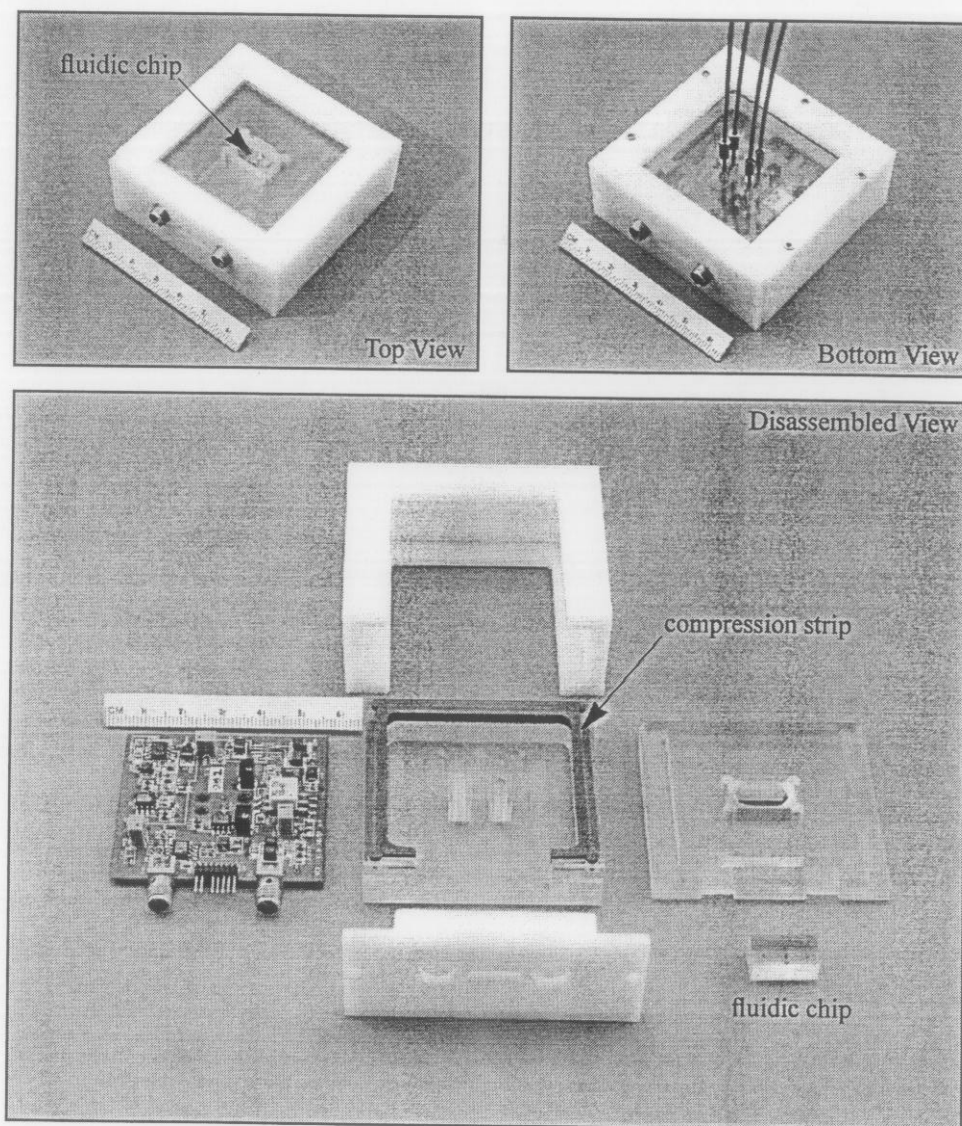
Top, bottom, and disassembled views of slide-together compression-package for the AC impedance sensor. No tools are required for assembly, and the fluidic chip is easily replaced, with the use of epoxy, wire bonds, or solder. The fluidic chip is mounted on the back side of the PC board to isolate it from the electronics. Bottom view shows the fluidic connections to the input and output ports.
